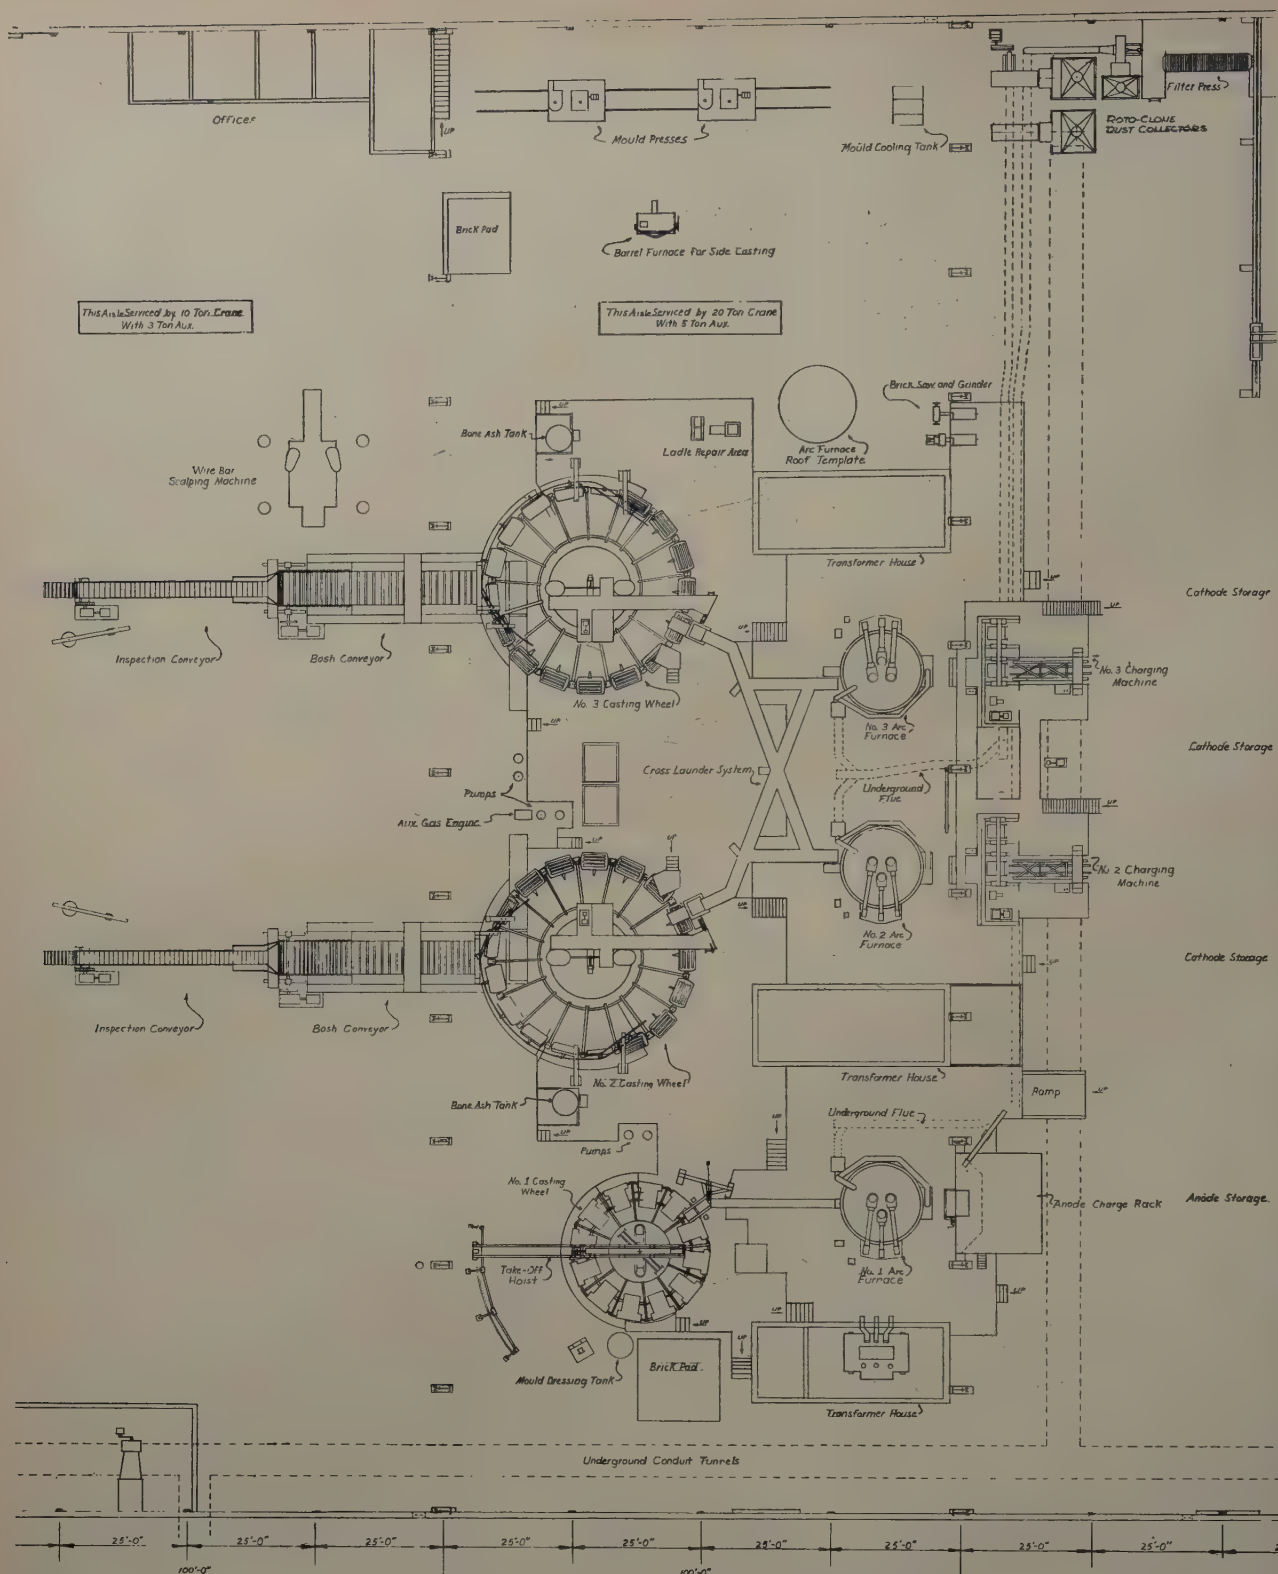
Diagrammatic layout of furnaces and casting equipment.
